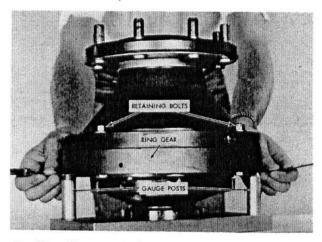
Measuring Gap between Ring Gear and Gauge Post
